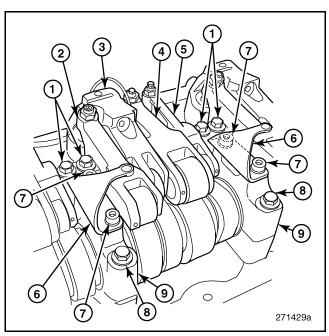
Exhaust Valve, Injector, Inlet Valve and Exhaust Brake Rocker Arms
